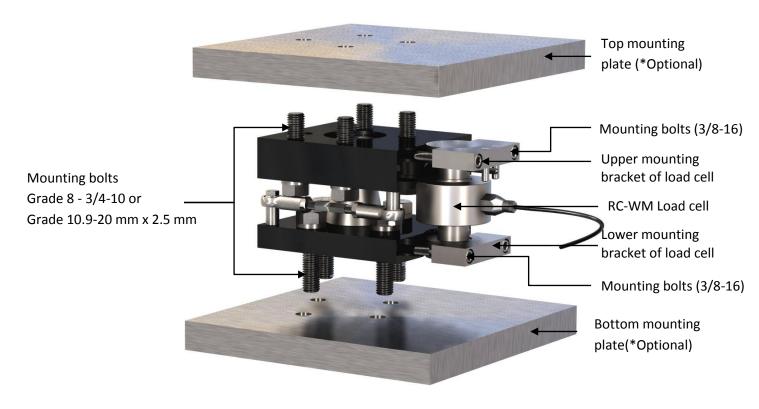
RC-WM weigh module-Exploded view with mounting plates
